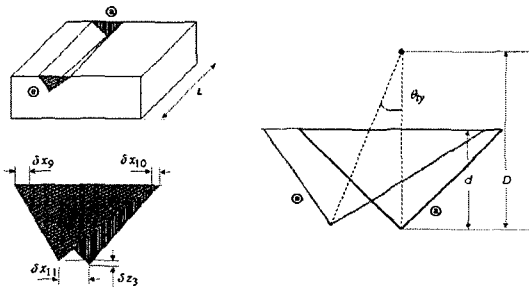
Micro-features with setup error by tool rotation about the y axis
